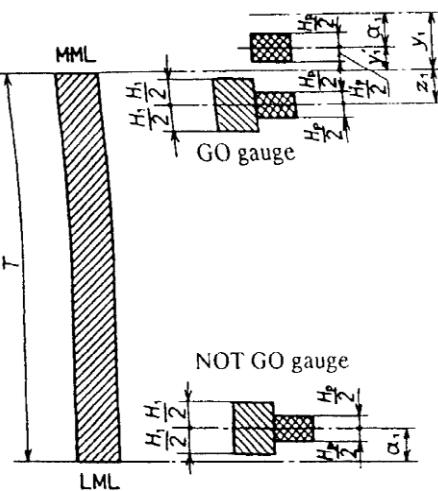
Correlation between tolerance zone of limit gauge for hole and tolerance of hole
